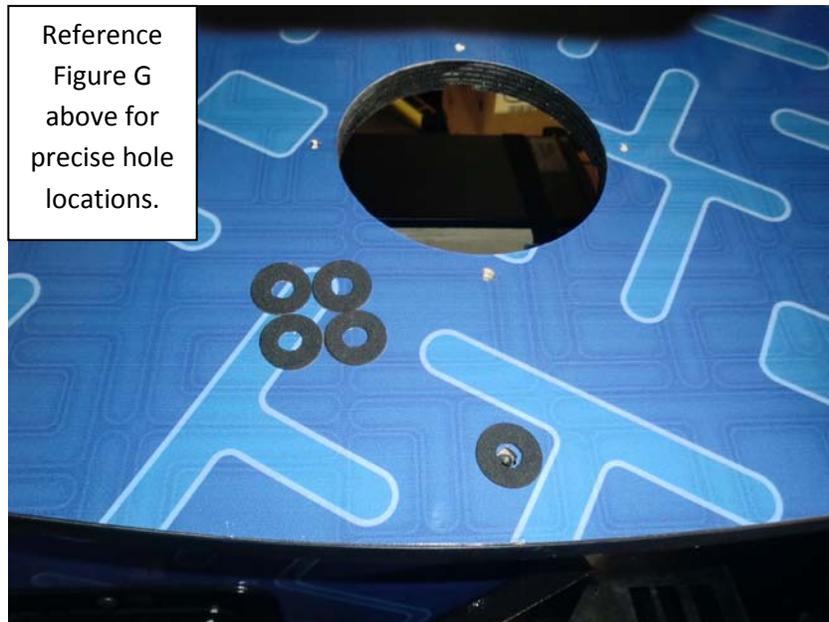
Figure H - Install Foam Washers Centered on (9) Control Panel Holes
